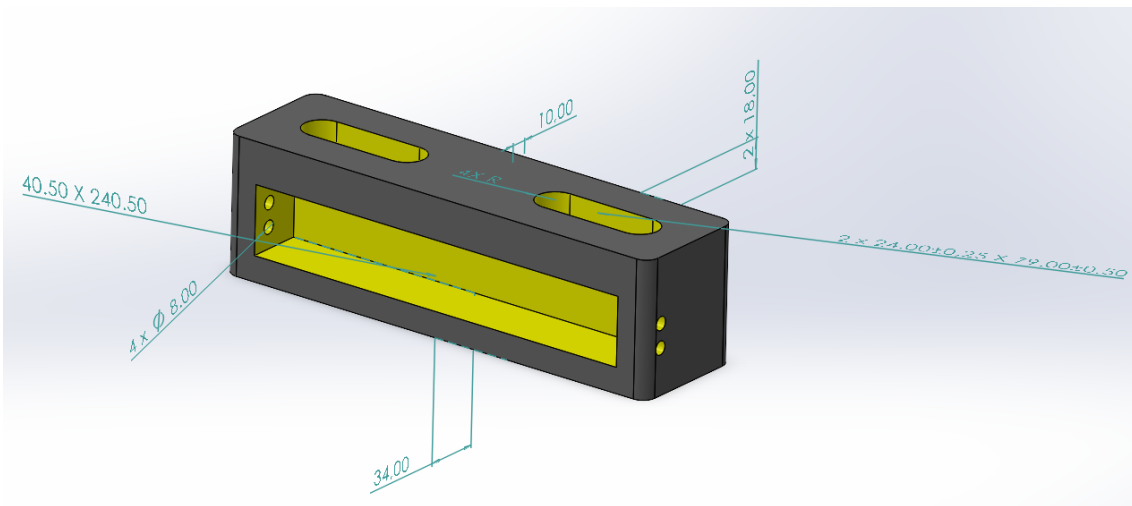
Dimensions in mm of the bottom POM casting on the movable stairs.
